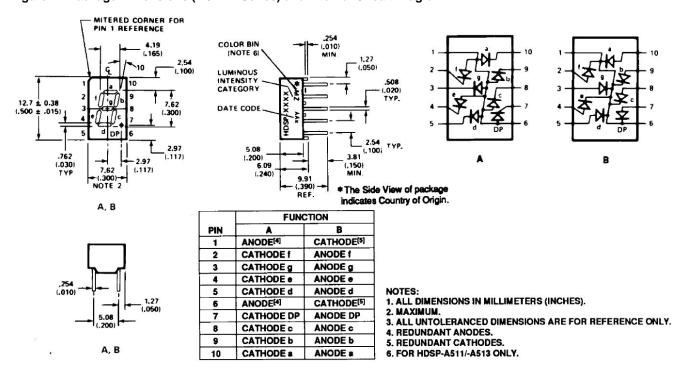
Package Dimensions (10-mm Series: Single) and Internal Circuit Diagram
